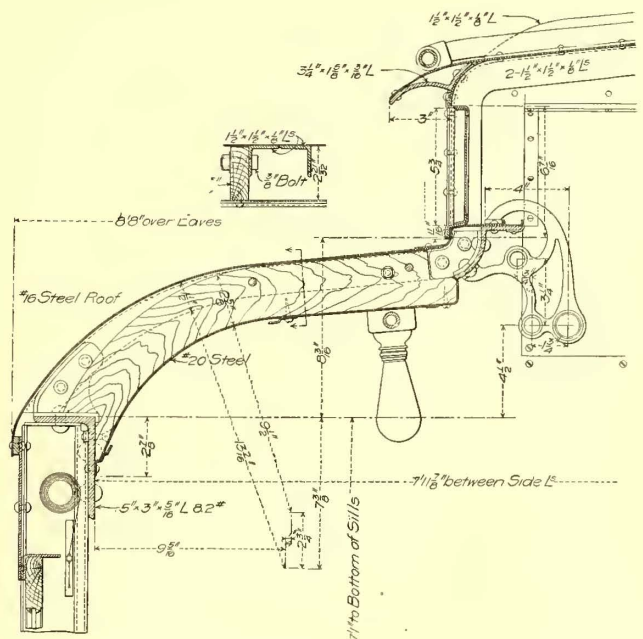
SECTION THROUGH UPPER PART OF CAR
